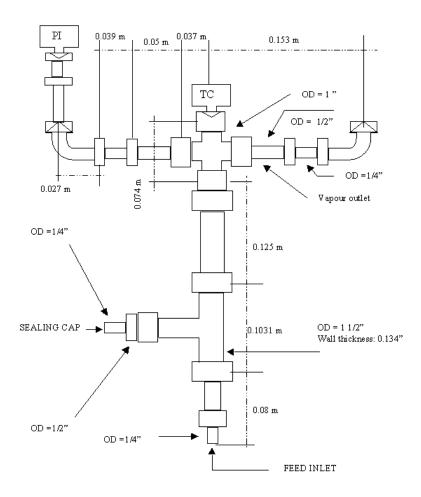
Drawing of the coker bottom inlet version showing approximate dimensions.
